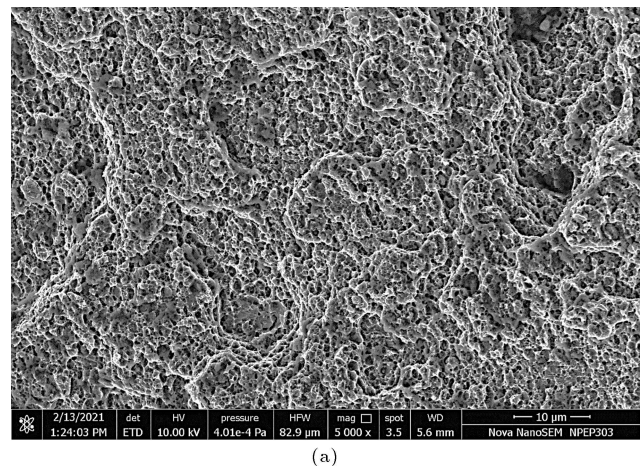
Damaged samples for conical and conical threaded tool pin profiles.
